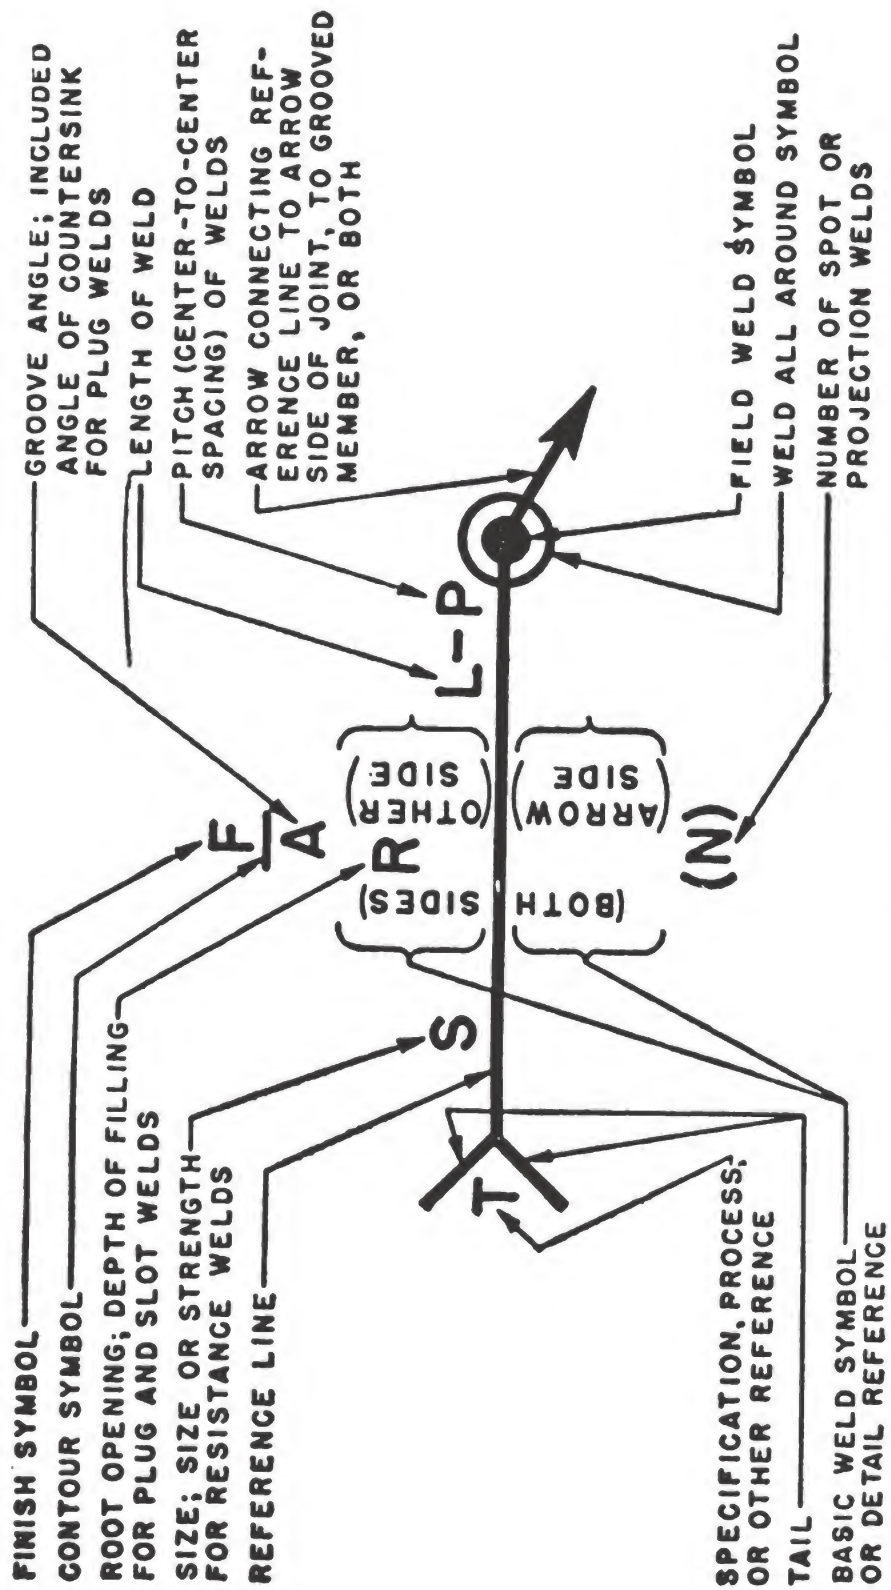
Standard location of elements on a welding symbol.
